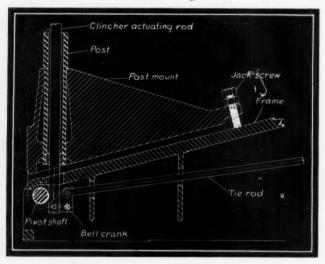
Mounting for post head maintains accurate die position during clinching but permits post to be tilted forward for loading certain work assemblies
